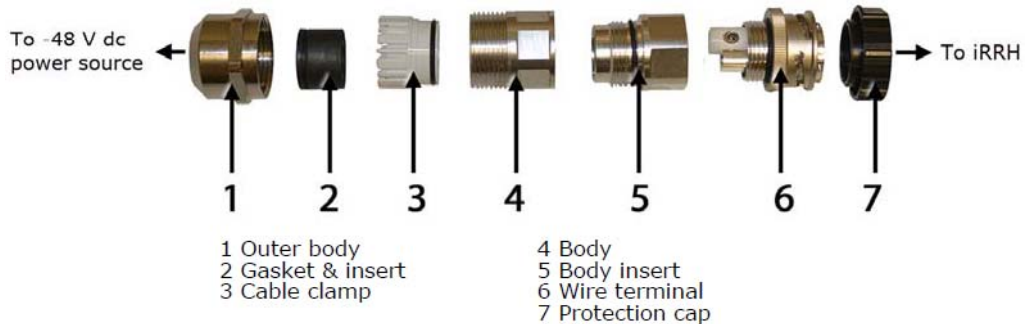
Rosenberger -48 V DC power plug (exploded view)
